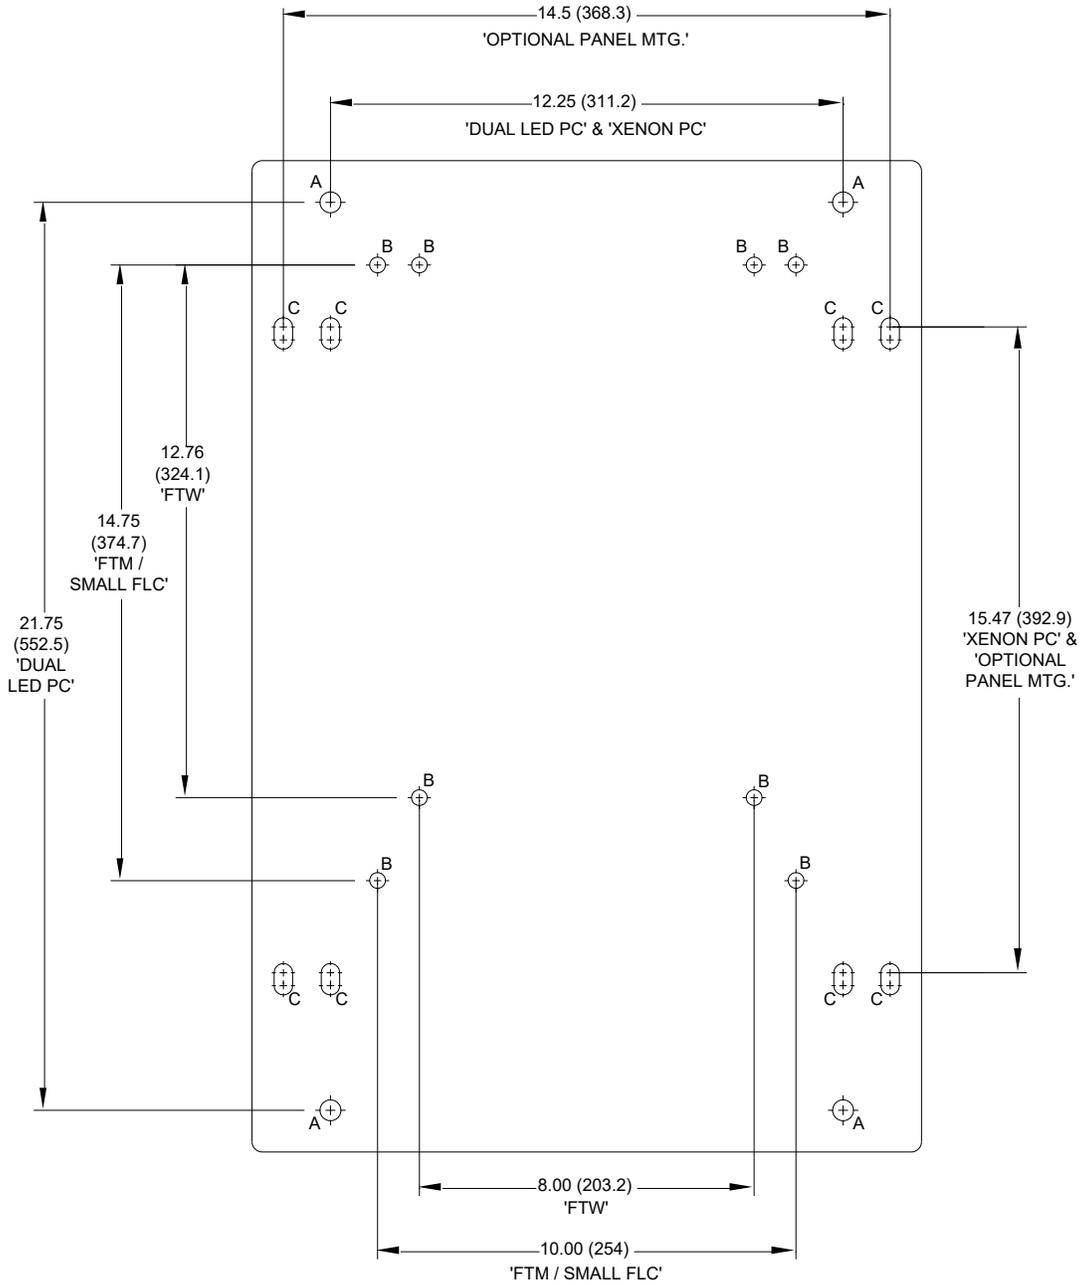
SC 370 Mounting and Outline (Painted Aluminum Option)
